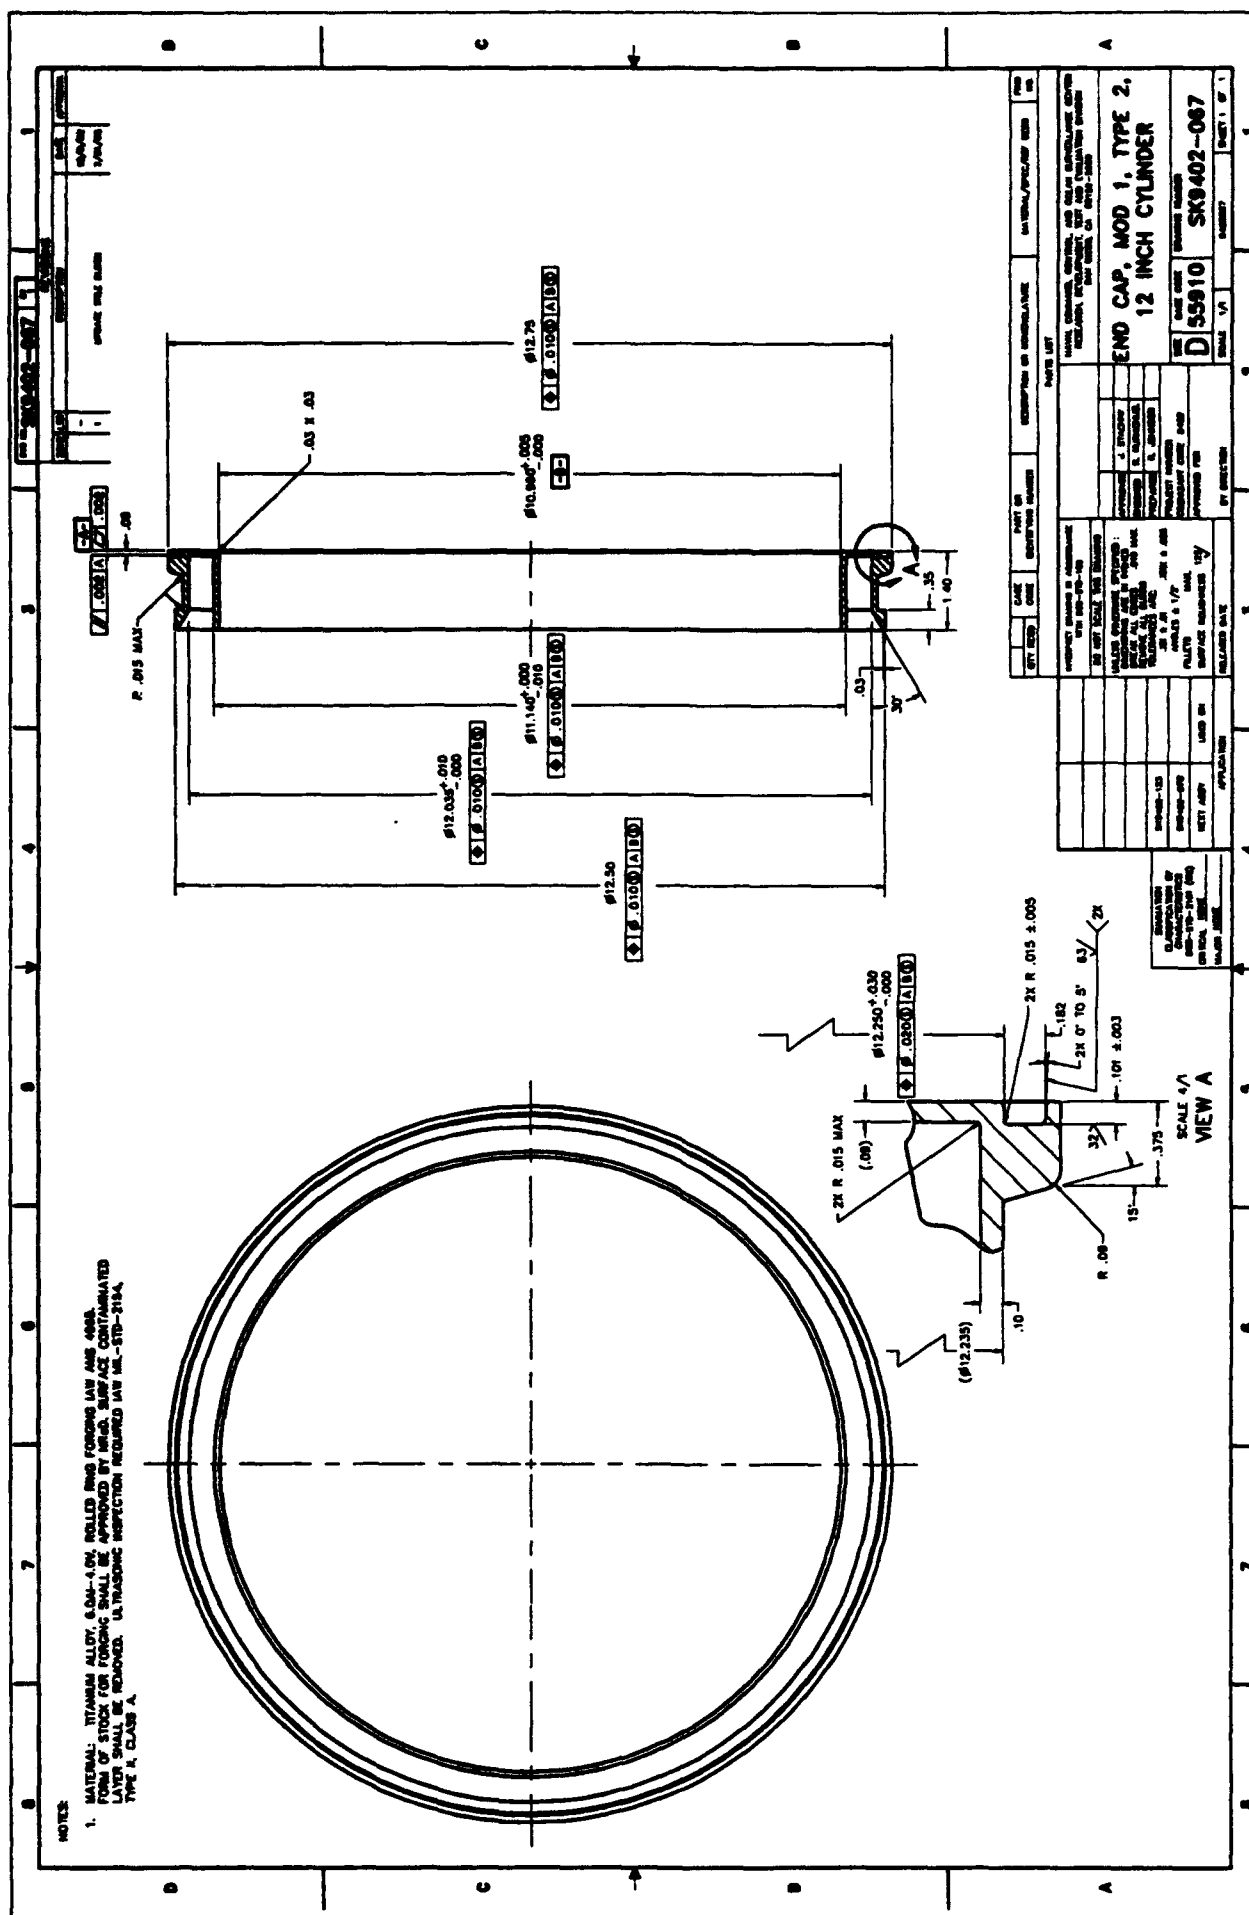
12-inch cylinder test assembly I configuration, Sheet 3.
